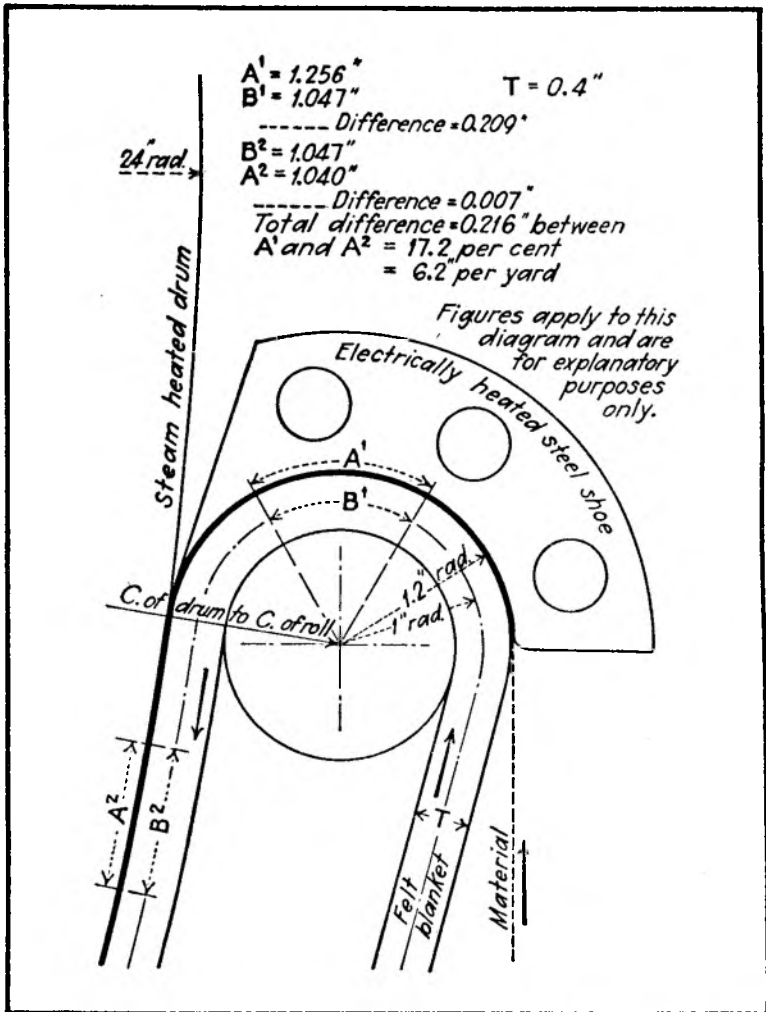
View of modified Palmer employed in compressive shrinkage process
